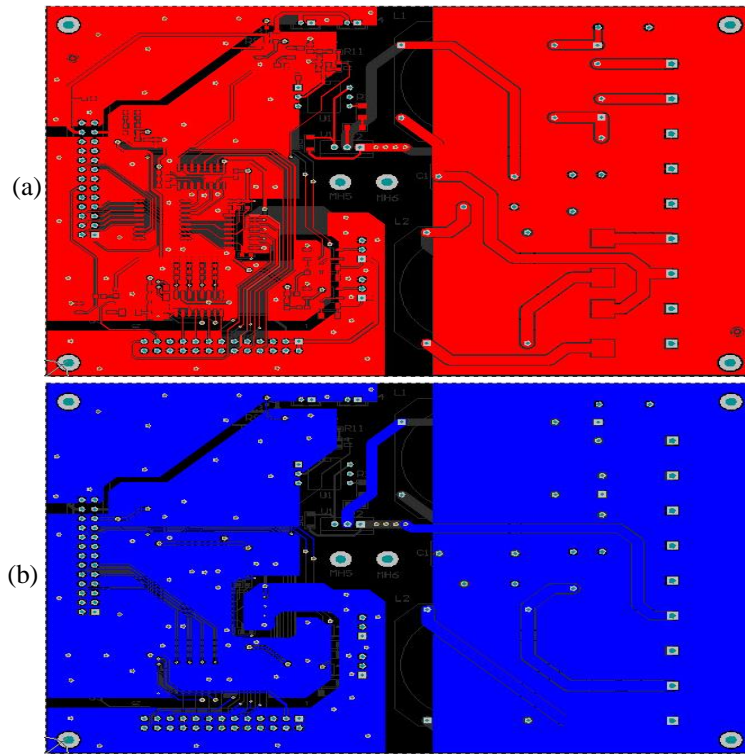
PCB layout of servo driver interface module. (a). Top layer (b). Bottom layer
